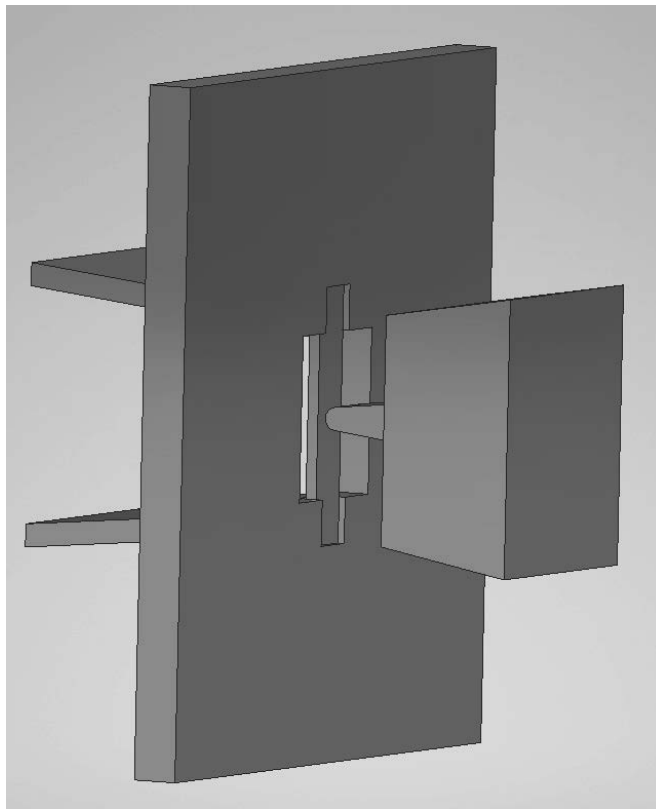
3D assembly of the grip, jaw with pin, and specimen components
